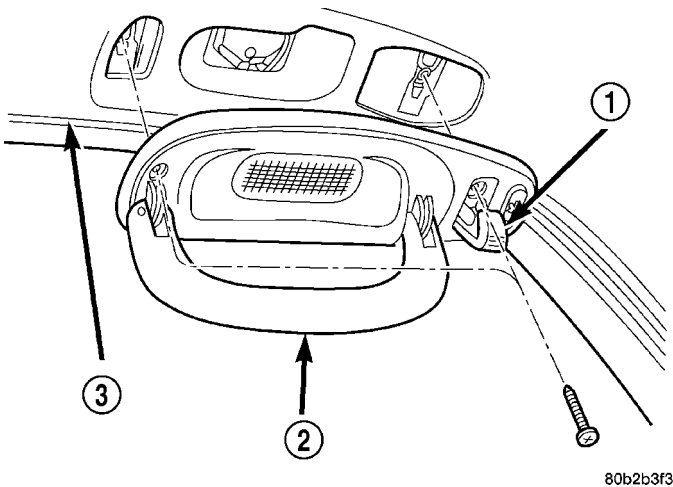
REAR ASSIST HANDLE AND READING LAMP
